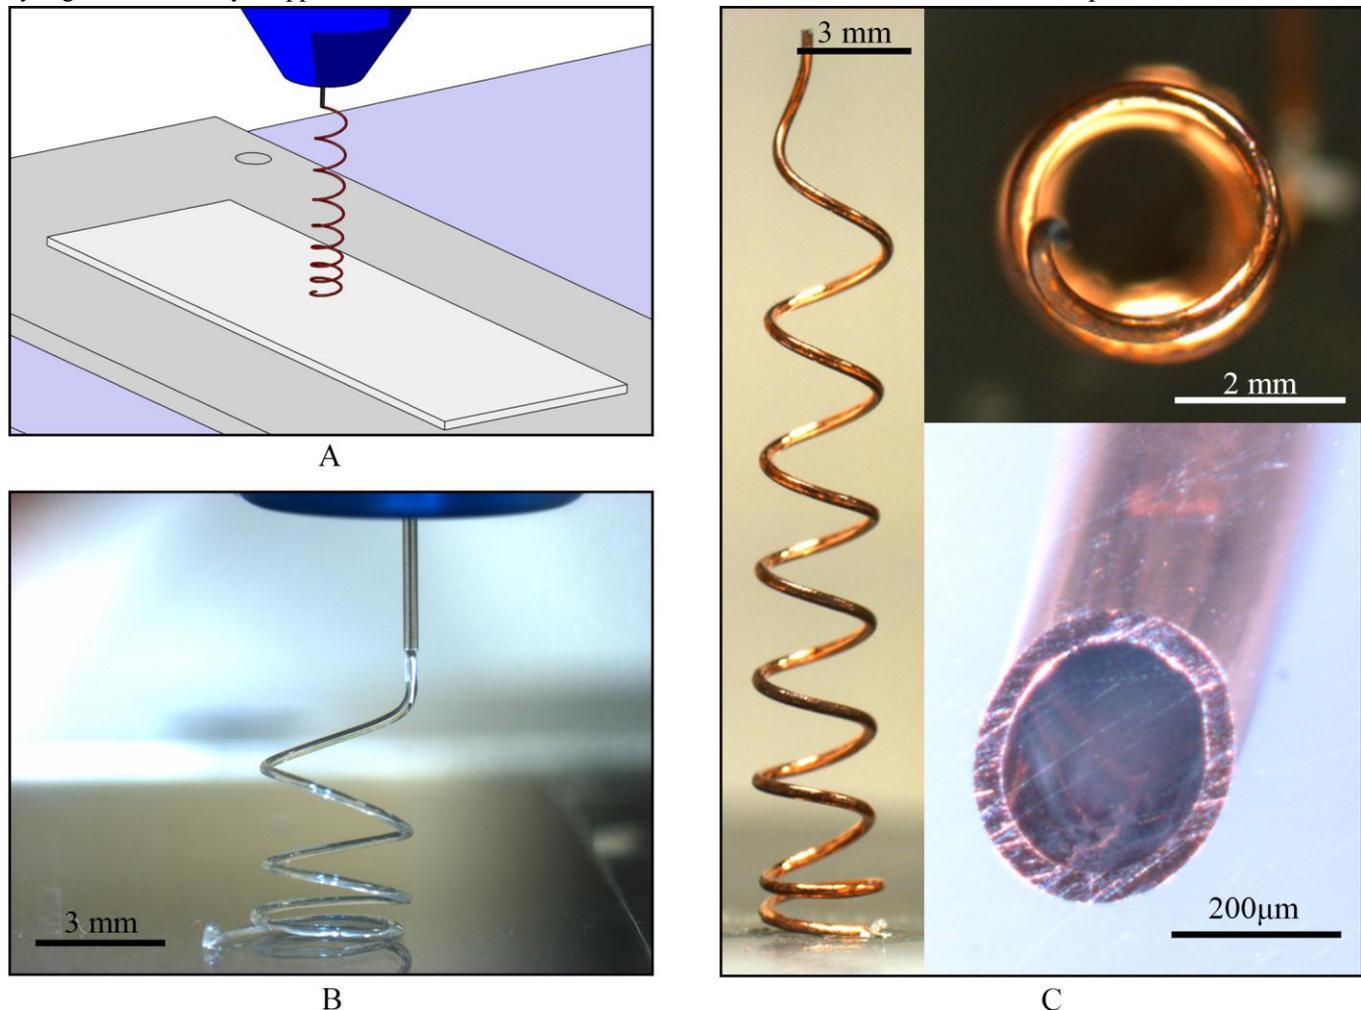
Fabrication of the helical antenna using the freeform printing technique. A) Schematic, and B) Optical image of the setup used for the freeform 3D printing of antennas. C) Optical side, top and cross-sectional view images of the fabricated copper coated helical antenna. NSTI-Nanotech 2013, www.nsti.org, ISBN 978-1-4822-0584-8 Vol. 2, 2013
